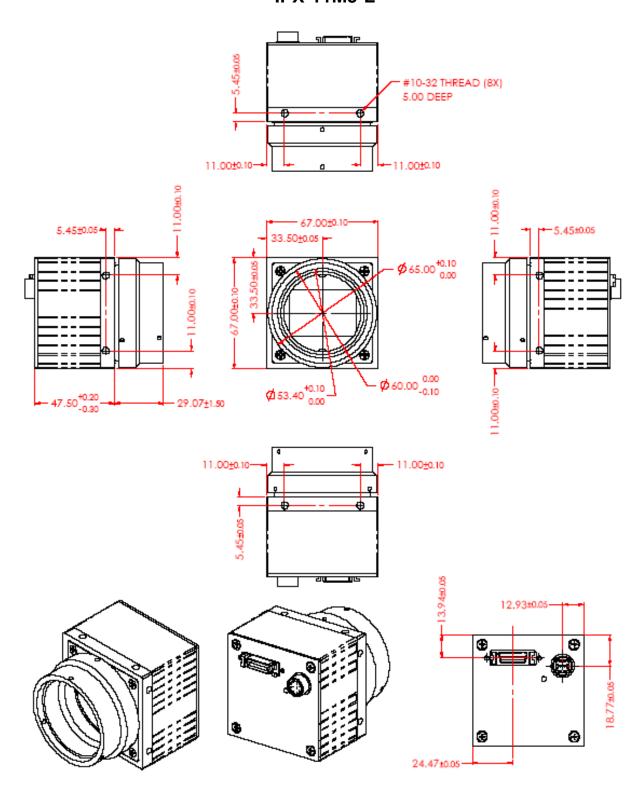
IPX-11M5-L (Silver Body) Dimensional Drawings
